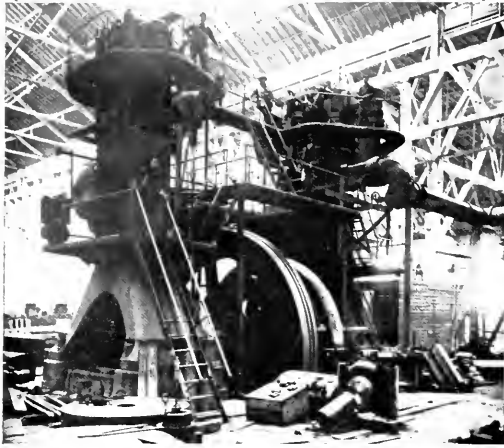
2,000-KW DIRECT-CONNECTED GENERATOR, PALACE OF MACHINERY.
